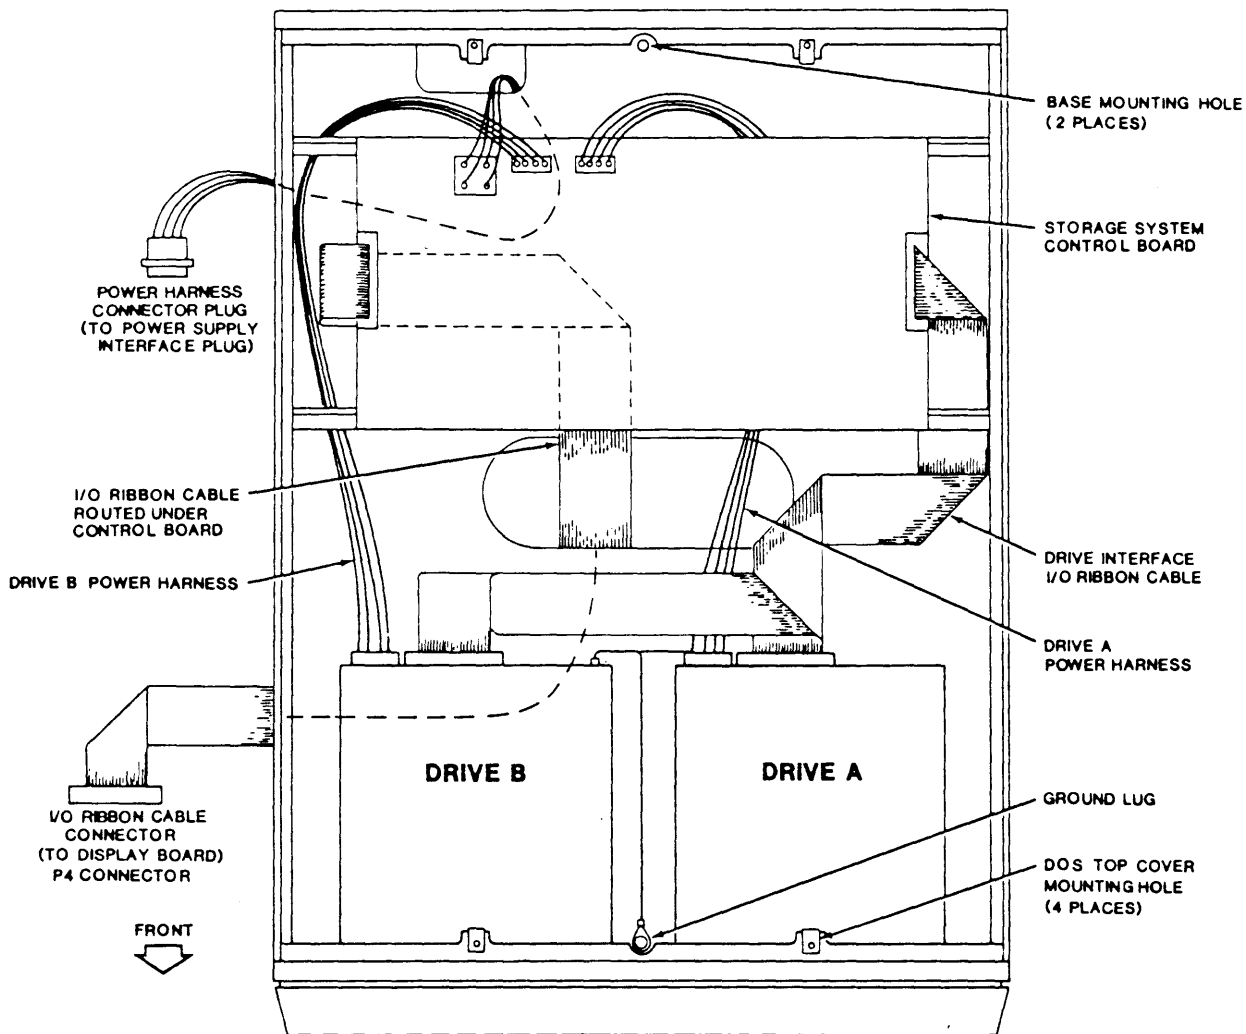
K450 DSS Assembly, Top View With Cover Removed
